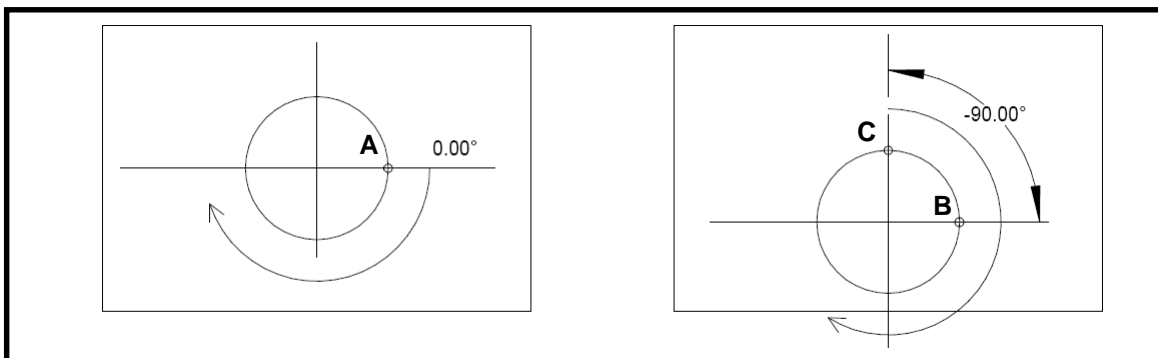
Weld Start Position for On-center (left) and Offset or Hillside (right) nozzles.
